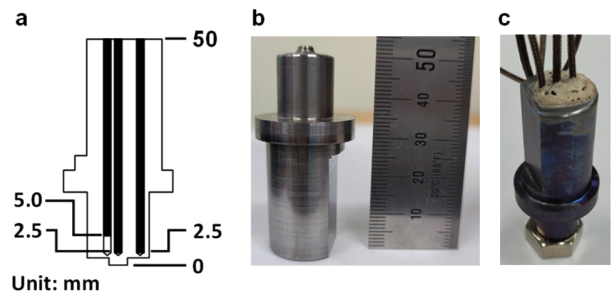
Thermocouple-integrated FSW tool: (a) thermocouple insertion positions and FSW tool design, (b) a fabricated FSW tool before thermocouple insertion, (c) thermocouple-integrated FSW tool
